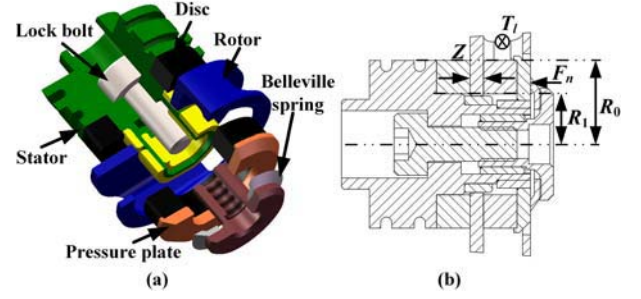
Clutch design. (a) Mechanical design of the clutch. (b) Schematic of the clutch.
